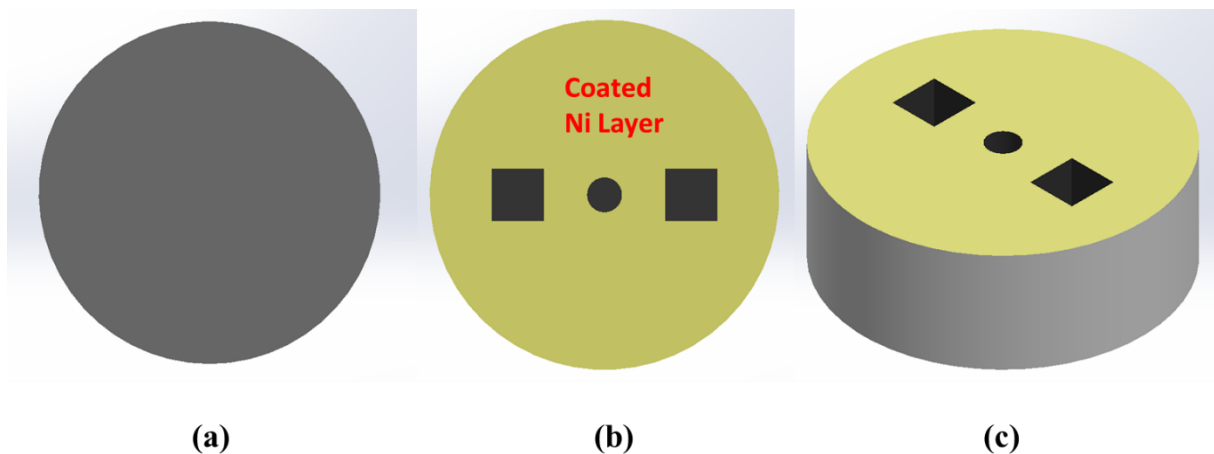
(a) Front Side of the Bearing Rotor Pad (b) Back Side of the Rotor Pad
